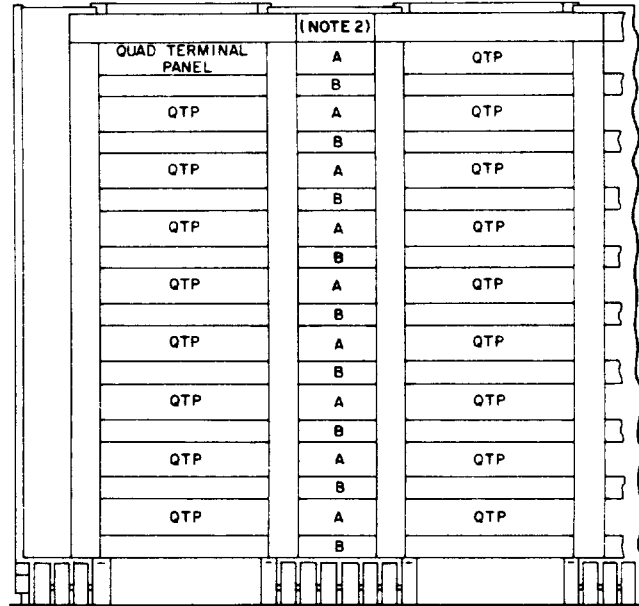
11-Foot 6-Inch T1WB5 Local Office Bay Arrangement
